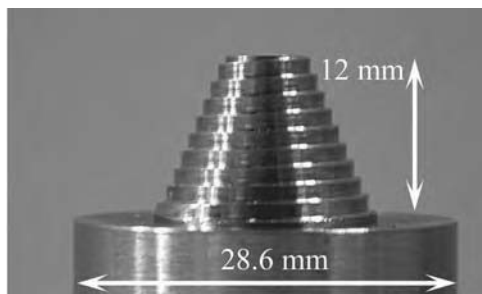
Photograph of a conical probe with stepped-spiral threads. Source: Ref 38
